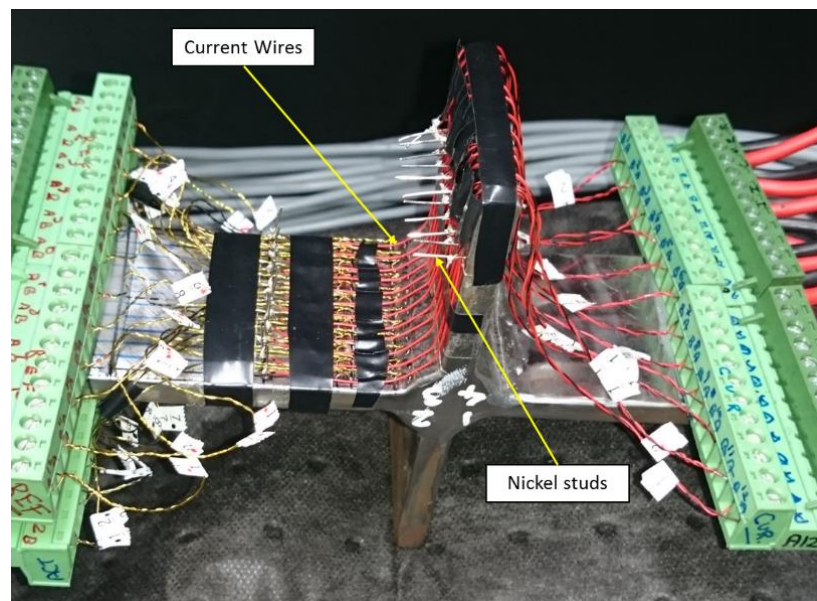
Specimen after wiring, ready for fatigue testing.
